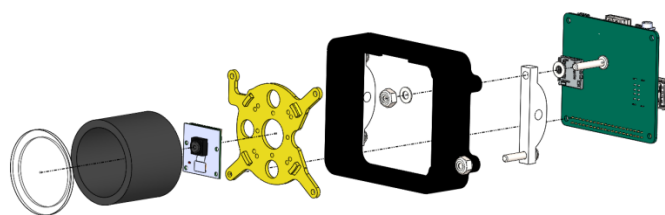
Exploded view of Blue Puttee's Camera Assembly
